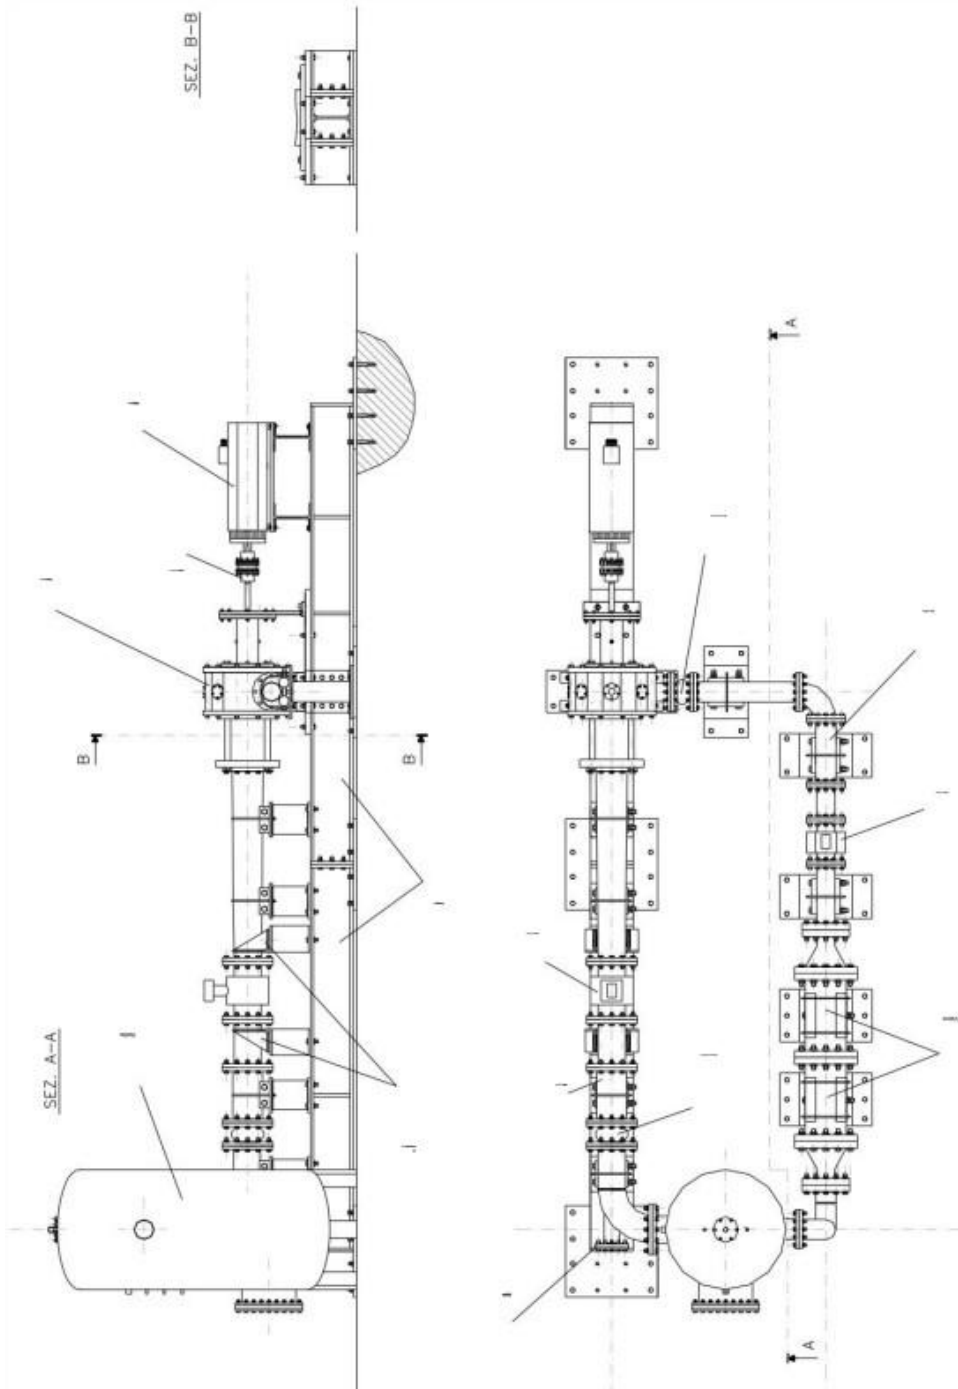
OVERALL CIRCUIT ASSEMBLY [9]
